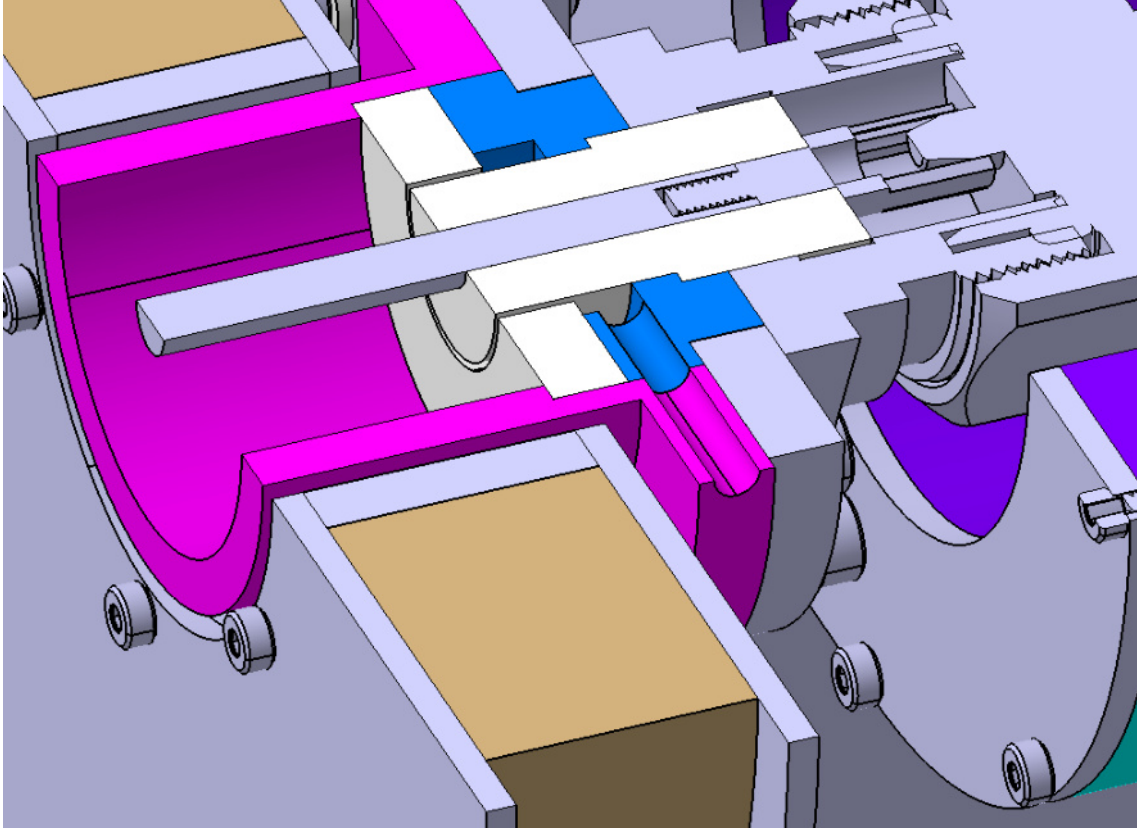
Sectional view of the CAD of one source. The IC is in pink, the blue part being an intermediary part in which the gas injection tube will be threaded.
